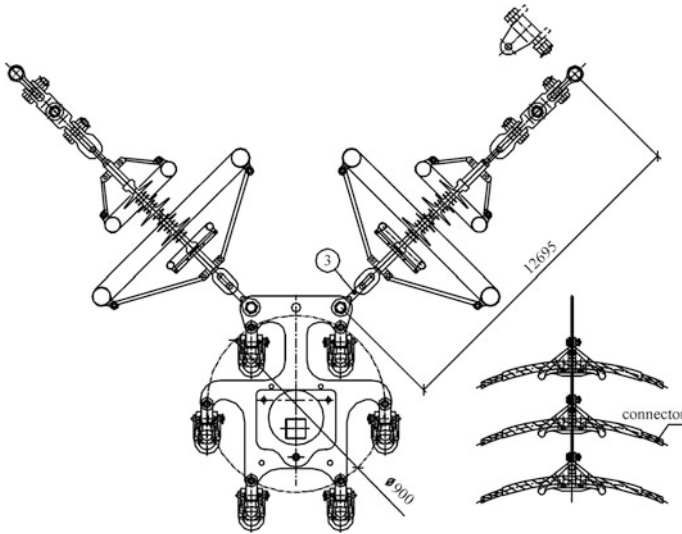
Assembly diagram of single V-type suspension insulator strings for ± 800 kV DC transmission lines (mm)
